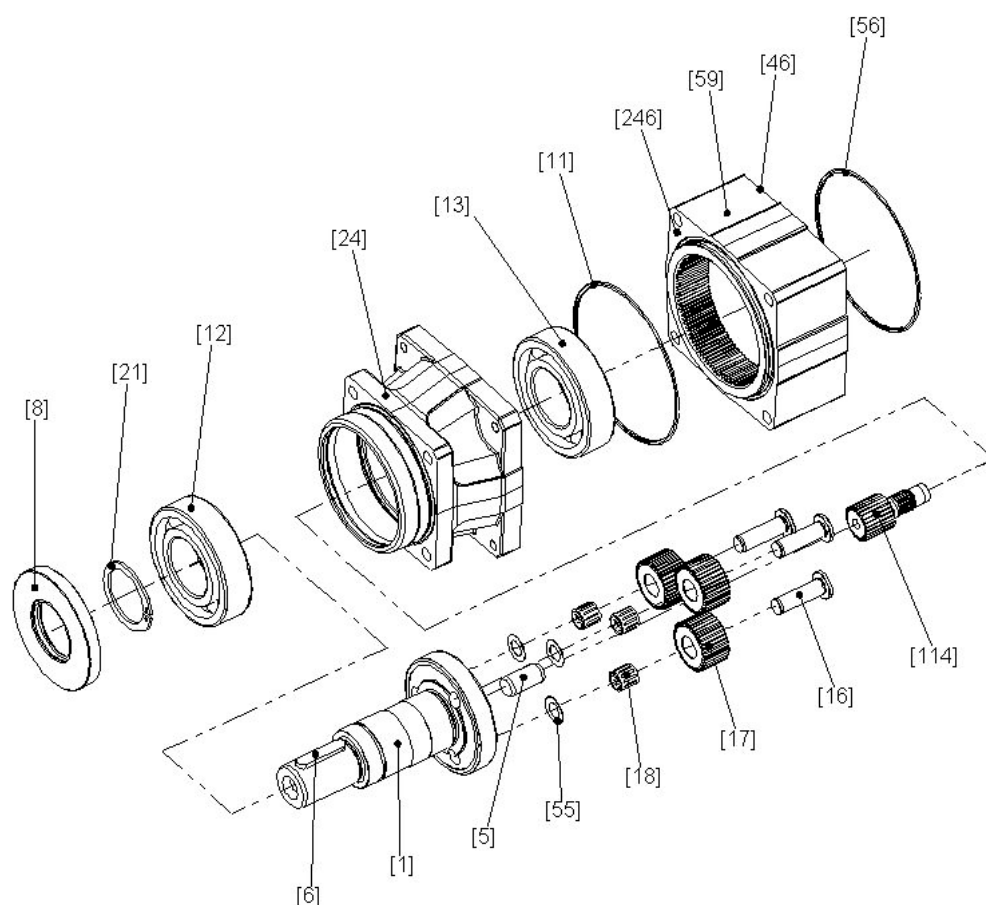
Basic design of a servo planetary gear unit PSKC121 to PSKC621
